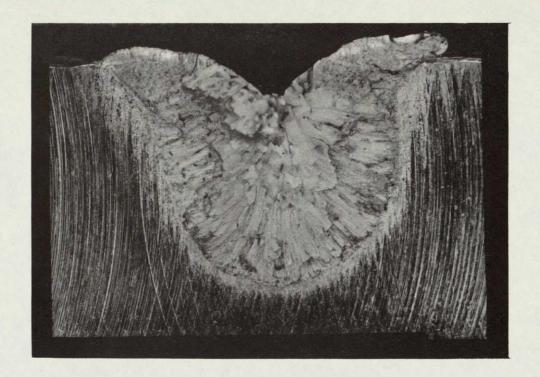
Fracture Surface of Weld in Tack Weld Area of Prepared Plate; Contains Cluster of Fine Porosity.
